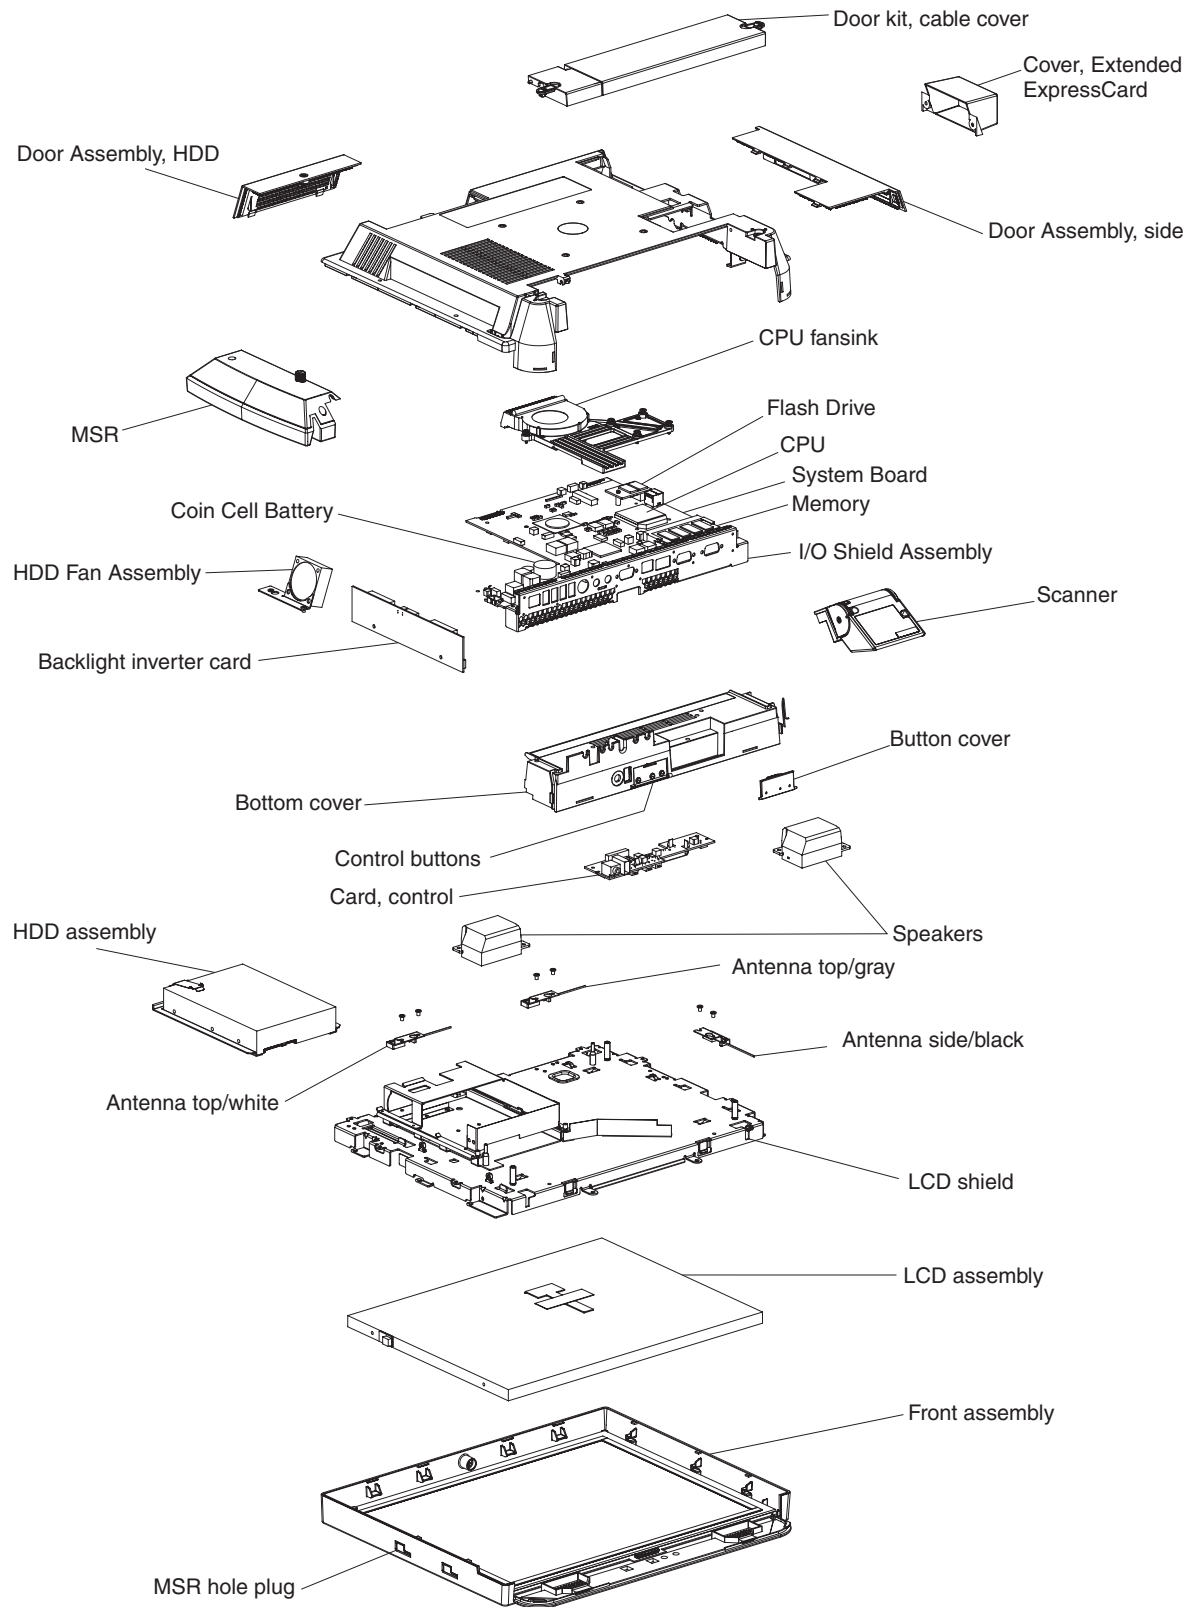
Exploded view of the IBM AnyPlace Kiosk assembly
